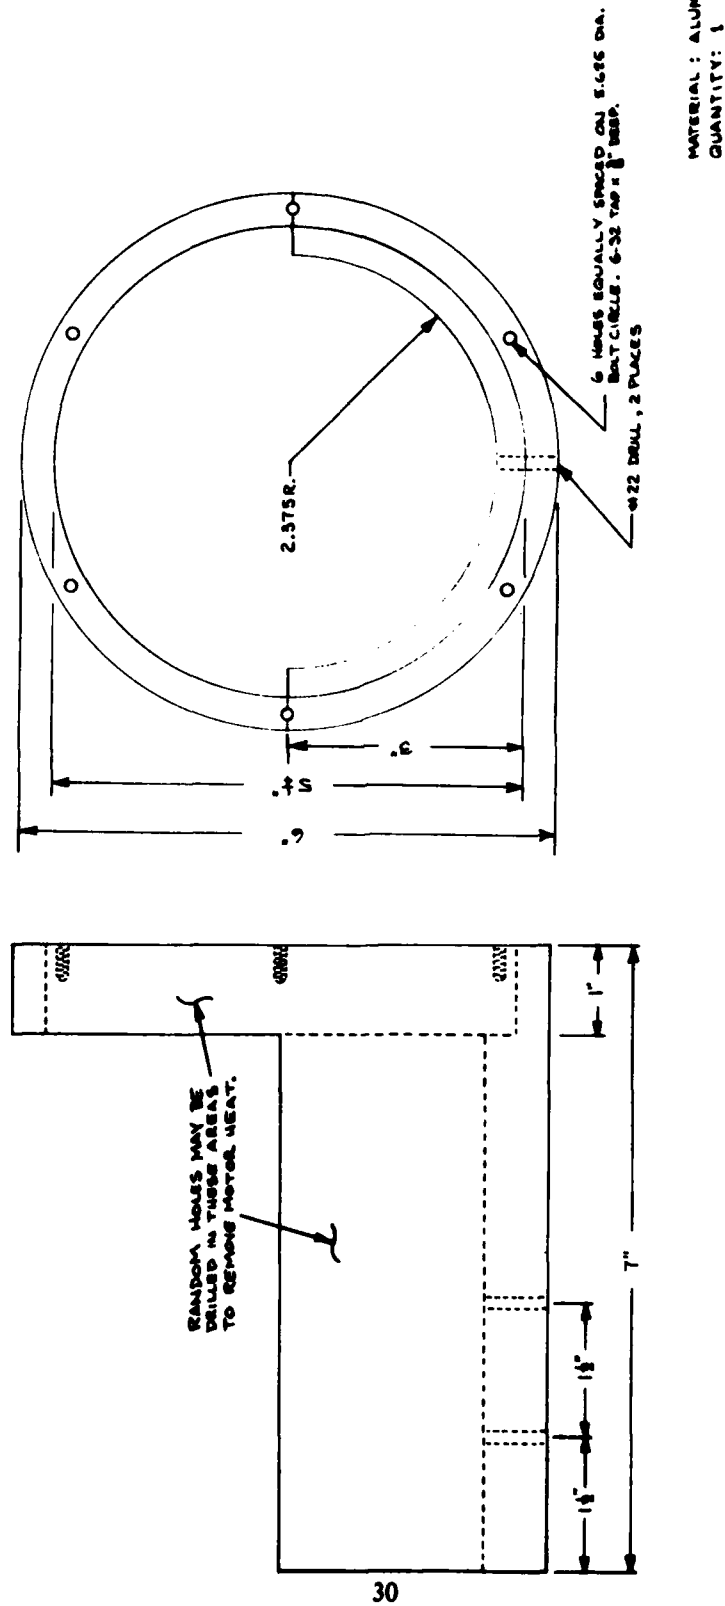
Part2]: (not shown in Fig. 3): the motor mount
